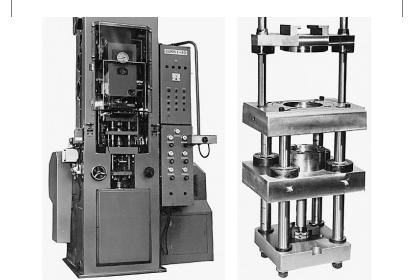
(Left) Typical press for the compacting of metal powders. A removable die set (right) allows the machine to be producing parts with one die set while another is being fitted to produce a second product. (*Courtesy of Alfa Laval, Inc., Warminster, PA.*)
